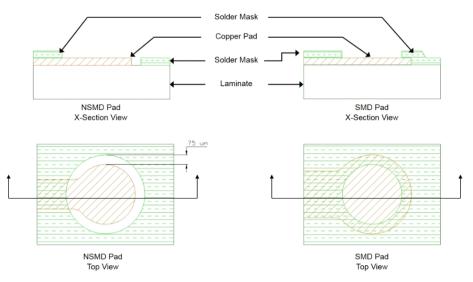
NSMD and SMD Pad Designs for WLCSP PCB Terminal
